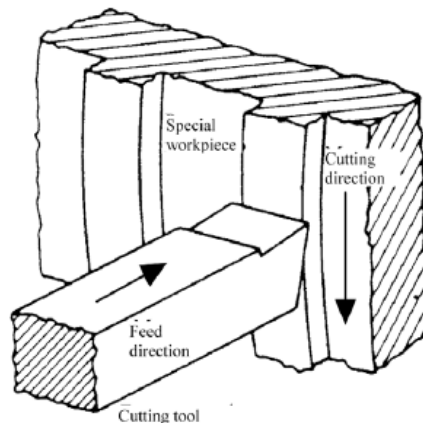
Orthogonal cutting diagram with cutting tool being fed perpendicular to the cutting direction [43].
